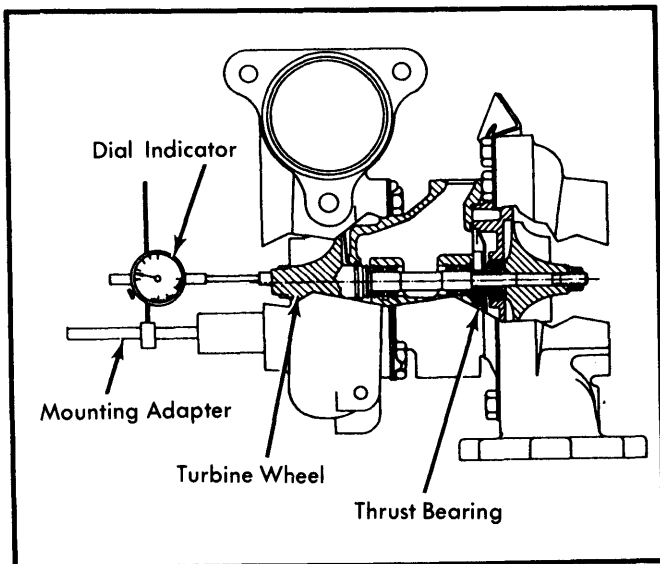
Dial Indicator Installation for Measuring Thrust Bearing Axial Clearance
